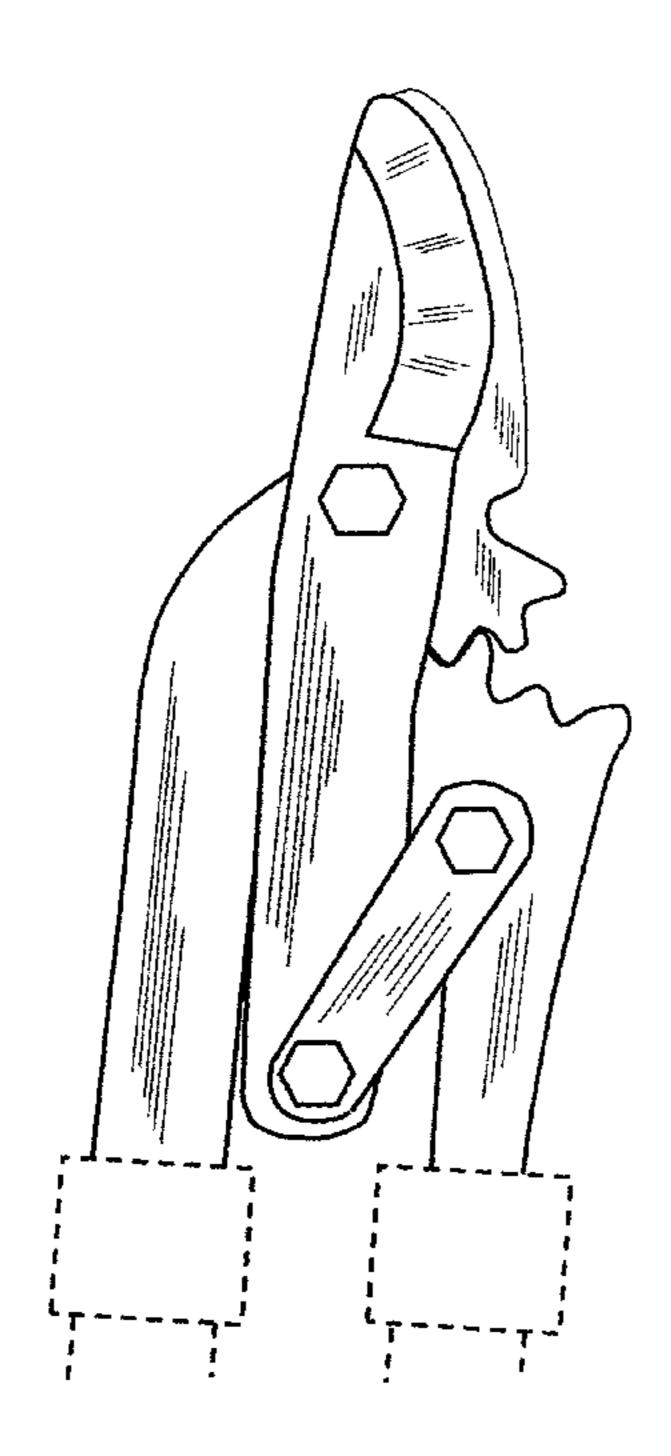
is a left side view of the compound gear lopper cutting head, being the reverse side as shown in FIG. 1 showing my design;
